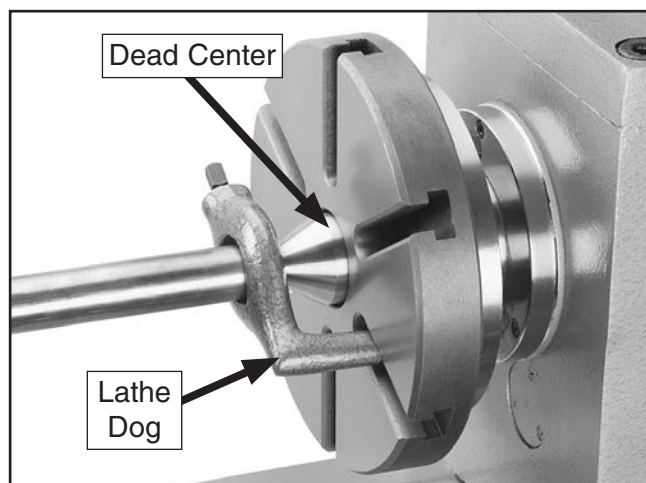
Example photo of using a dead center with a faceplate and lathe dog.
